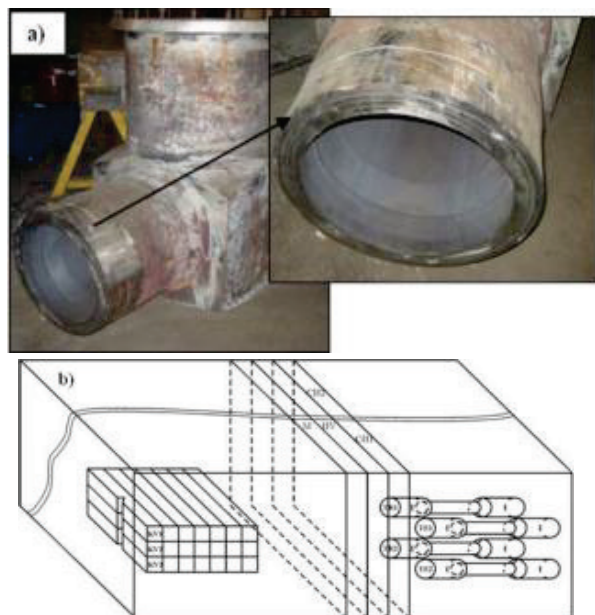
a) Main steam gate valve and sampling zone on connected pipe in vicinity of welded joint; b) Scheme of sampling [1].
